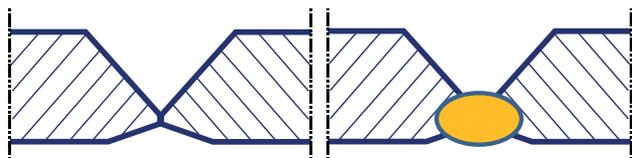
Examples of welding defects due to the problems related to welding operations of stainless steel, amplified by V-preparations on both extremities of the tube/elbow assemblies
